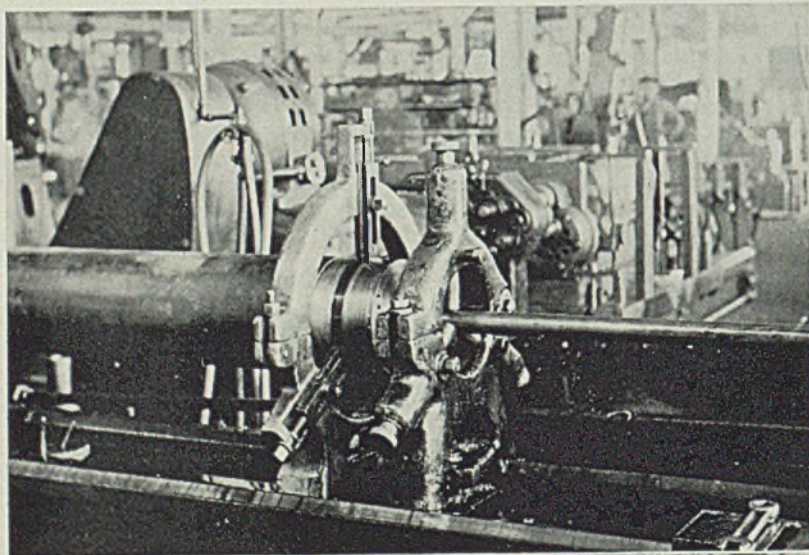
(Right) — Special horizontal boring mill for accurate boring of holes in the headstock. Fig. 5 (Above) — Setup for hollow boring spindle, similar principle being used in boring guns
